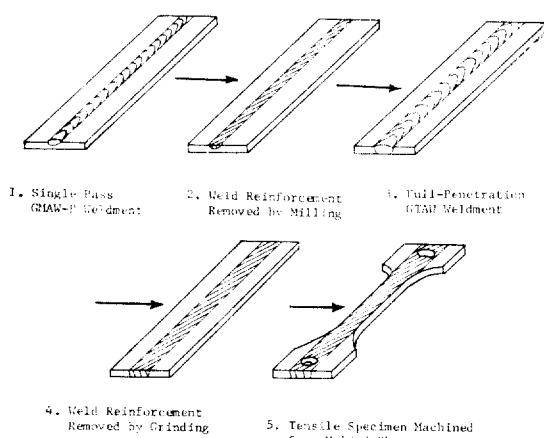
Schematic illustration of the dual welding process employed in the production of the duplex weld metals.
